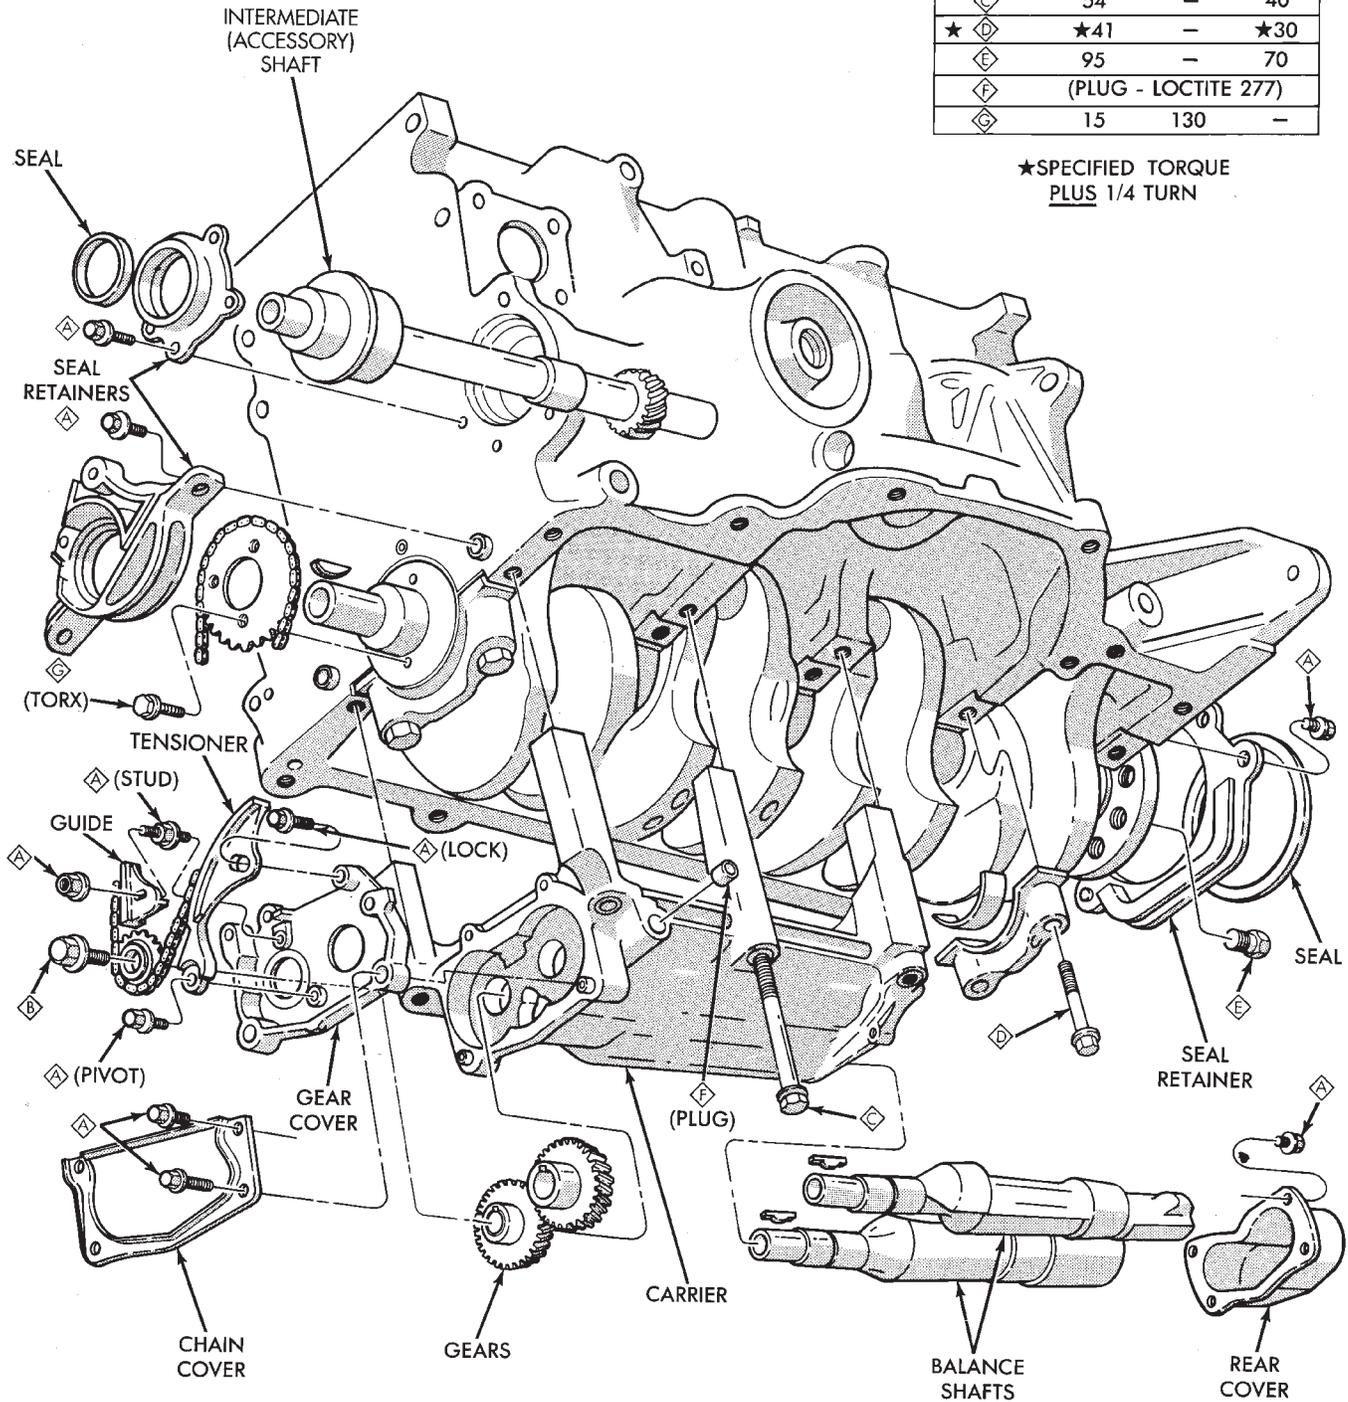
Crankshaft Intermediate and Balance Shaft Assemblies and Oil Seals
